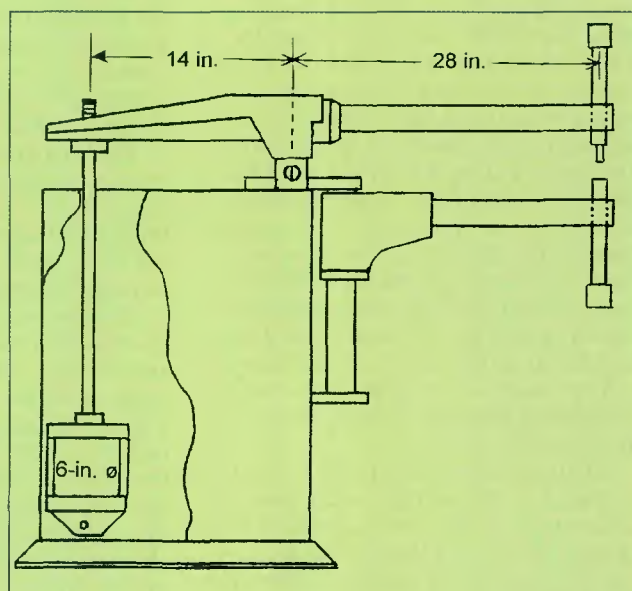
Sketch of a rocker arm spot welding machine with a 6-in.-diameter cylinder, 14-in. arm from cylinder connection point to the pivot, and 28-in. arm from the pivot to the electrode centerline.
